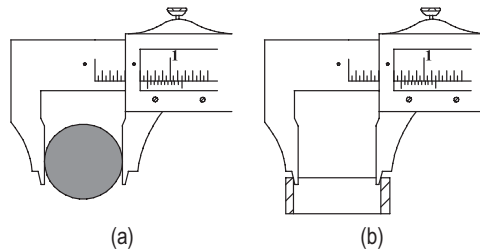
Measurement of dimensions (a) Outside dimension (b) Inside dimension
